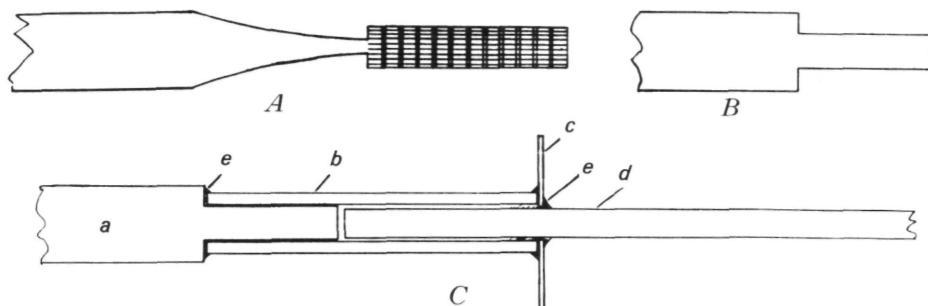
Construction of winding mandrel from straight handpiece bur shank. A, Bur, any kind can be used. B, Bur ground down forming stub 3-5 mm long and 1.0 mm thick. C, 1.0 mm tubing soldered over stub. A long piece is used to facilitate soldering and tubing is then cut off leaving 1.0 cm attached to bur (a, b). The winding wire (d) is then fitted in and a plate of stainless steel tape (c) is fitted over the wire and the whole soldered together (c).
